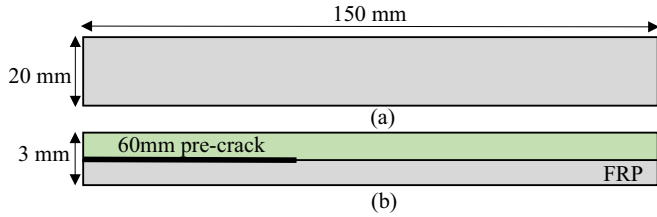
Dimension of the DCB and ENF test specimens, a-top view, b- side view.
